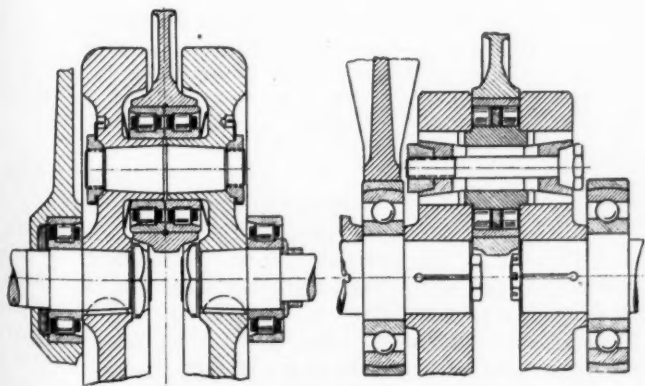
Roller bearing with tapered crankpin and flexible washers (Cologne Motorcycle Works Franz Becker)
